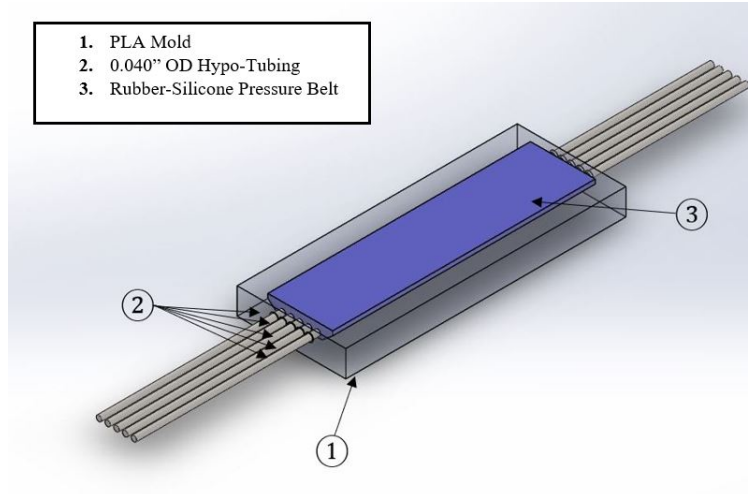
5-via belt mold assembly after rubber-silicone pour with insertable cores left in.
